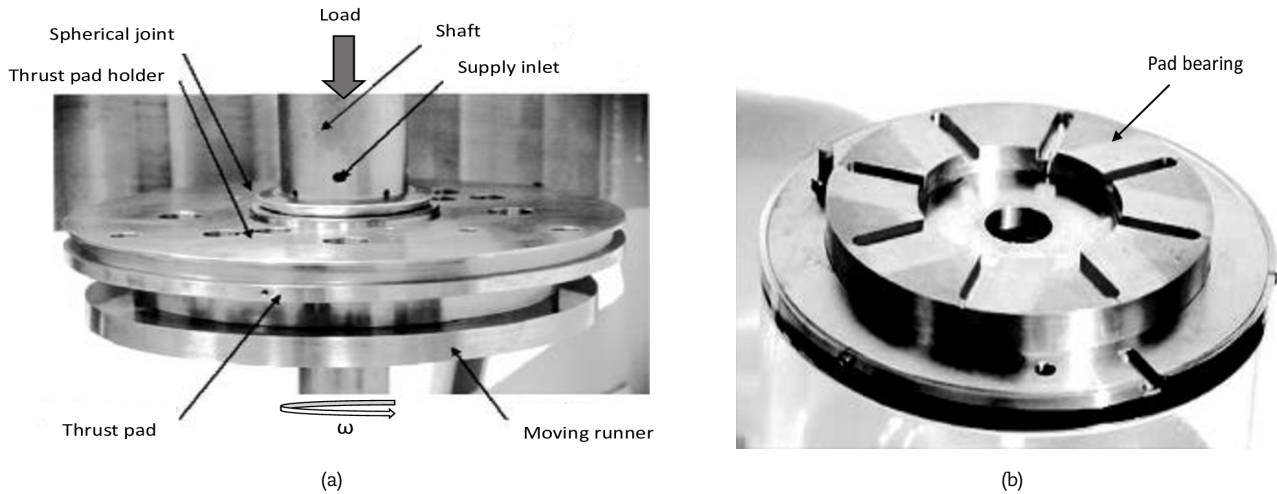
(a) Rotational guidance of a shaft by a fixed pad hydrodynamic thrust bearing [28], (b) Thrust bearing with 8 fixed pads [28].
